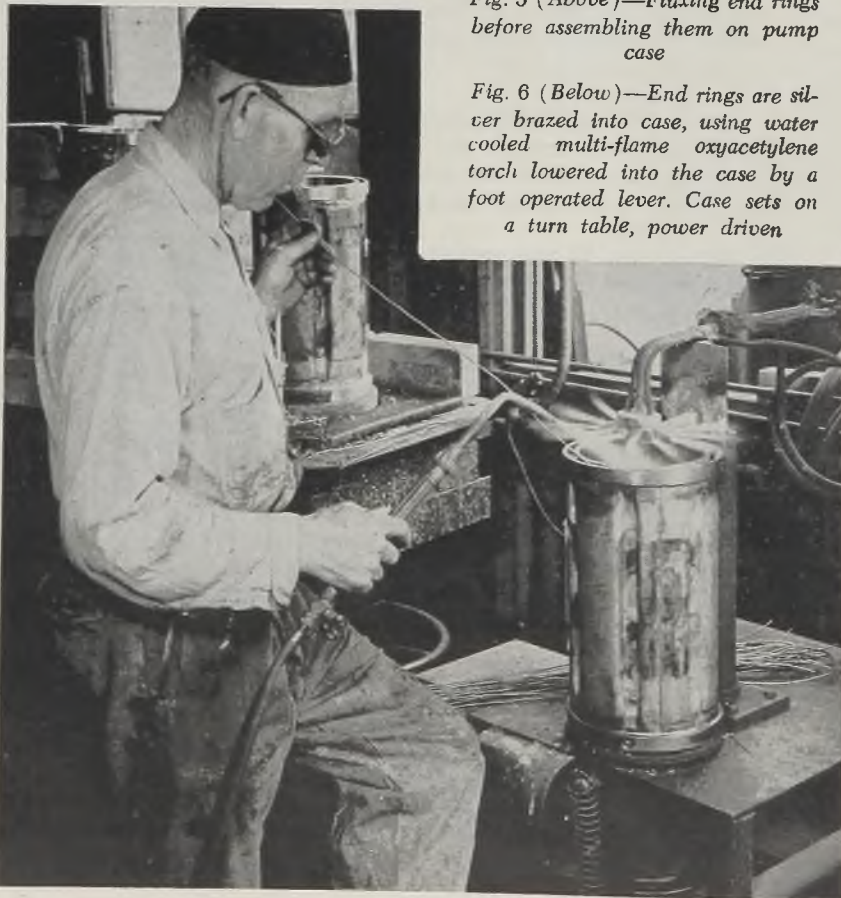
(Below)—End rings are silver brazed into case, using water cooled multi-flame oxyacetylene torch lowered into the case by a foot operated lever. Case sets on a turn table, power driven
